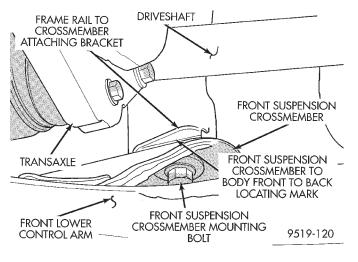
Front Suspension Crossmember Front To Back Locating Mark (Left Side Front)
